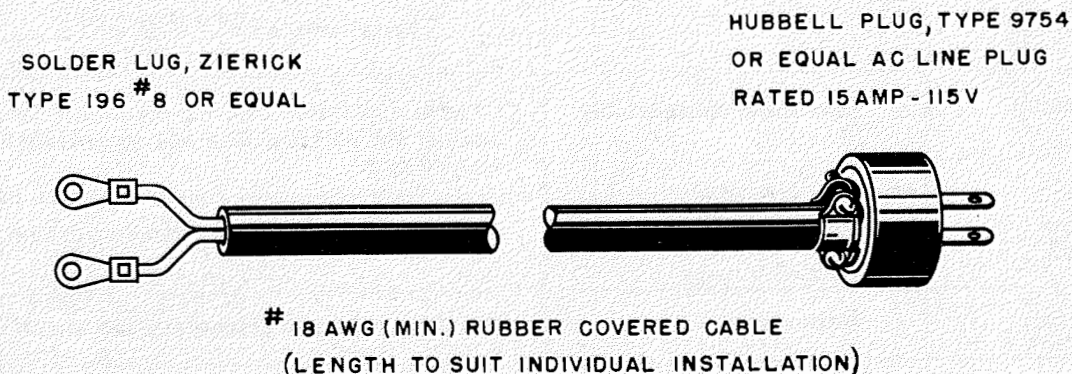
Radio Receiver R-361/GR, Power Cable Assembly
